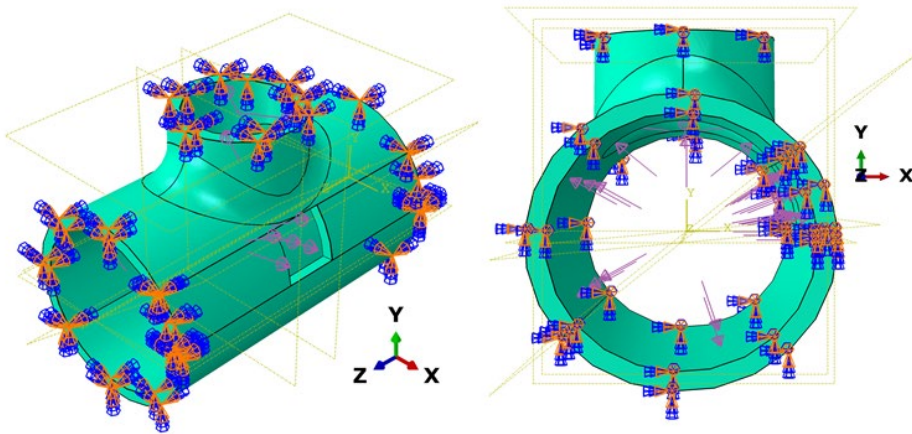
Boundary conditions of the welding reducing tee.
